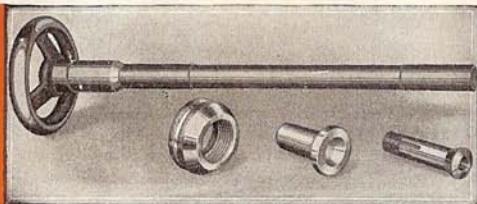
Hand Wheel Type Draw-in Collet Chuck Attachment for Lathe.
